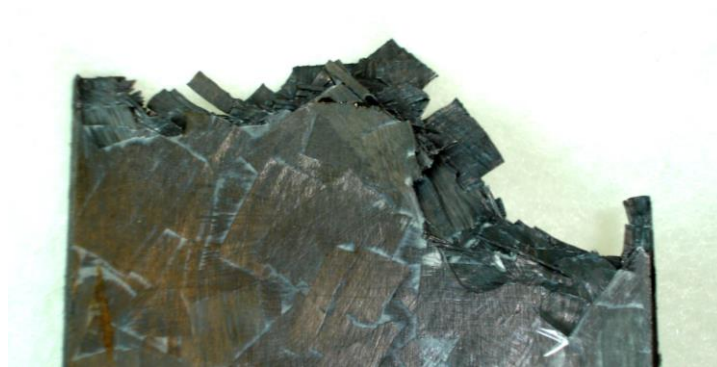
Fractures sample with 10mm chips length, showing intra and inter-chip failure
